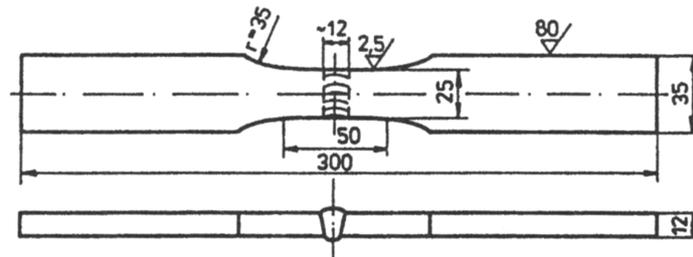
Samples used for fatigue tests with weld nob's left in place
